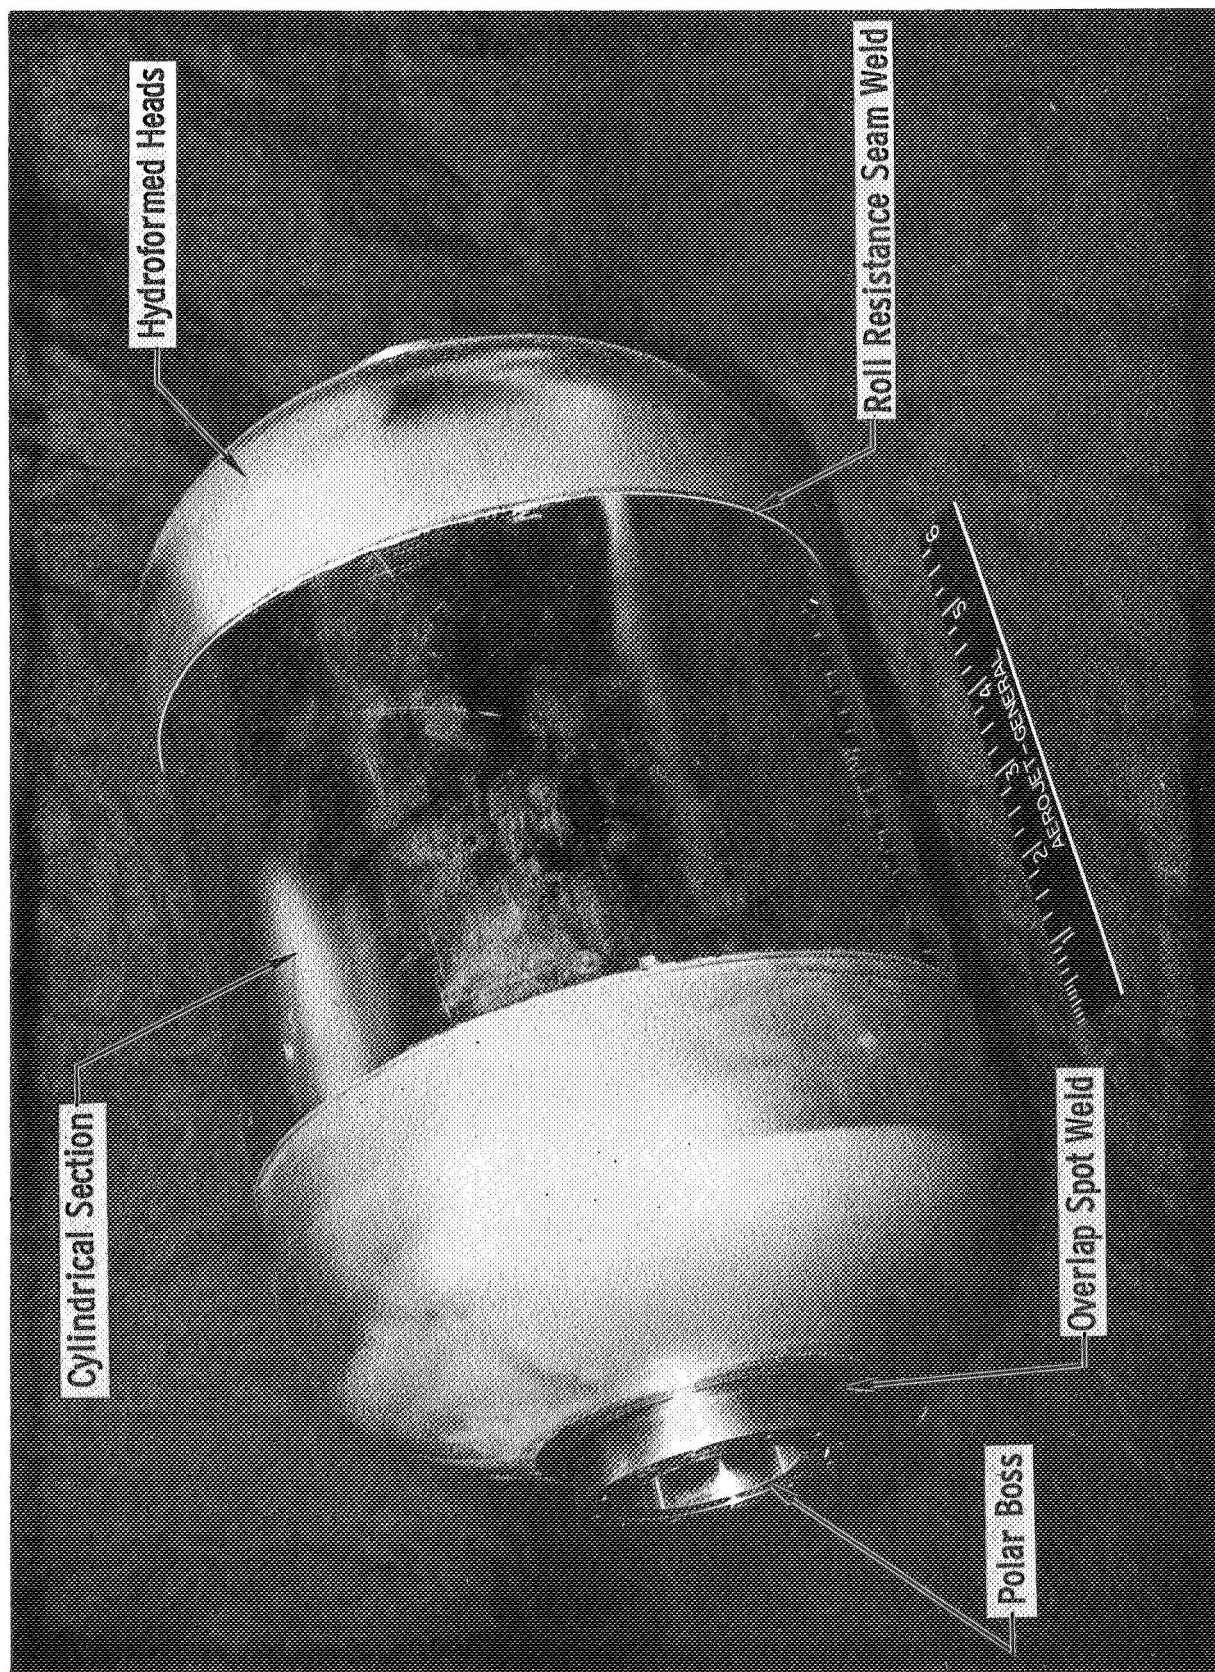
Metal Liner for Design A Vessels Pg. 80
